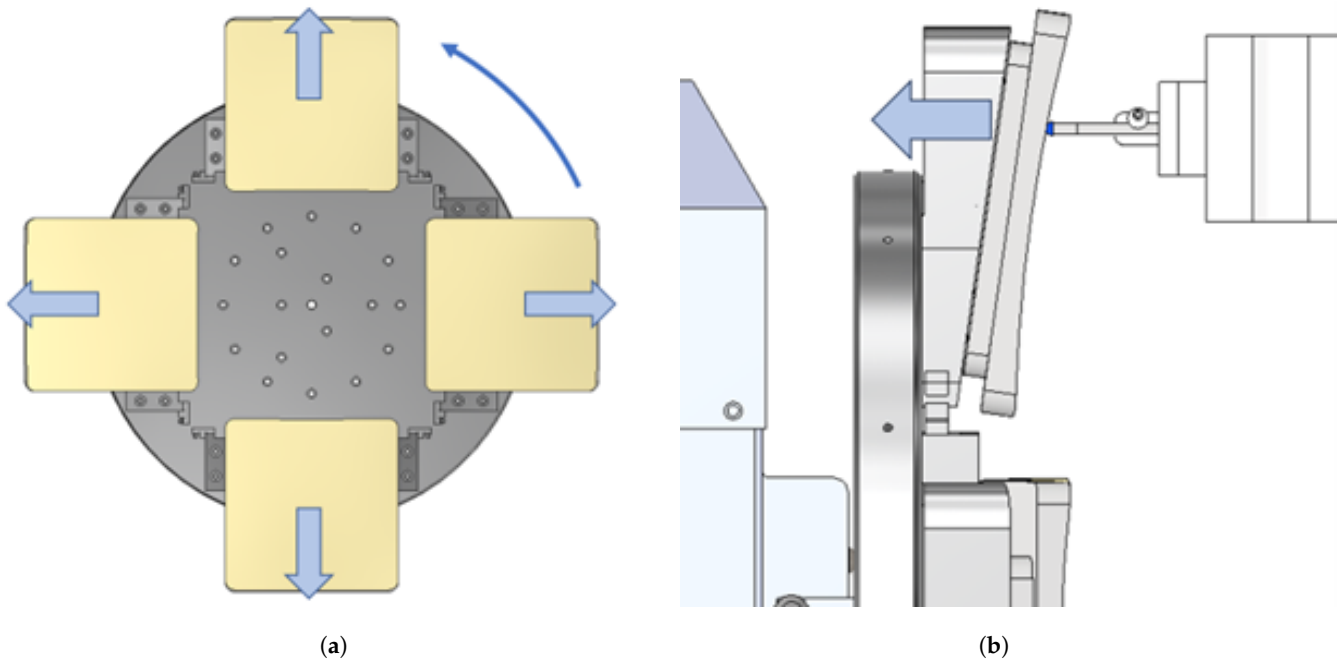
(a) Direction of the force induced by centrifugal force when the fixture rotates at high speed. (b) Diamond tool exerting a cutting force on the segment and machining fixture.
